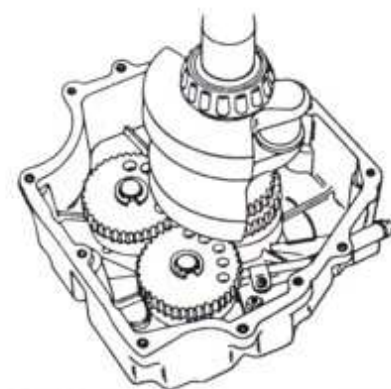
View showing Dyna-Static balancer gears installed in Model HH80, HH100 or HH120 crankcase cover. Note gear retaining snap rings.
